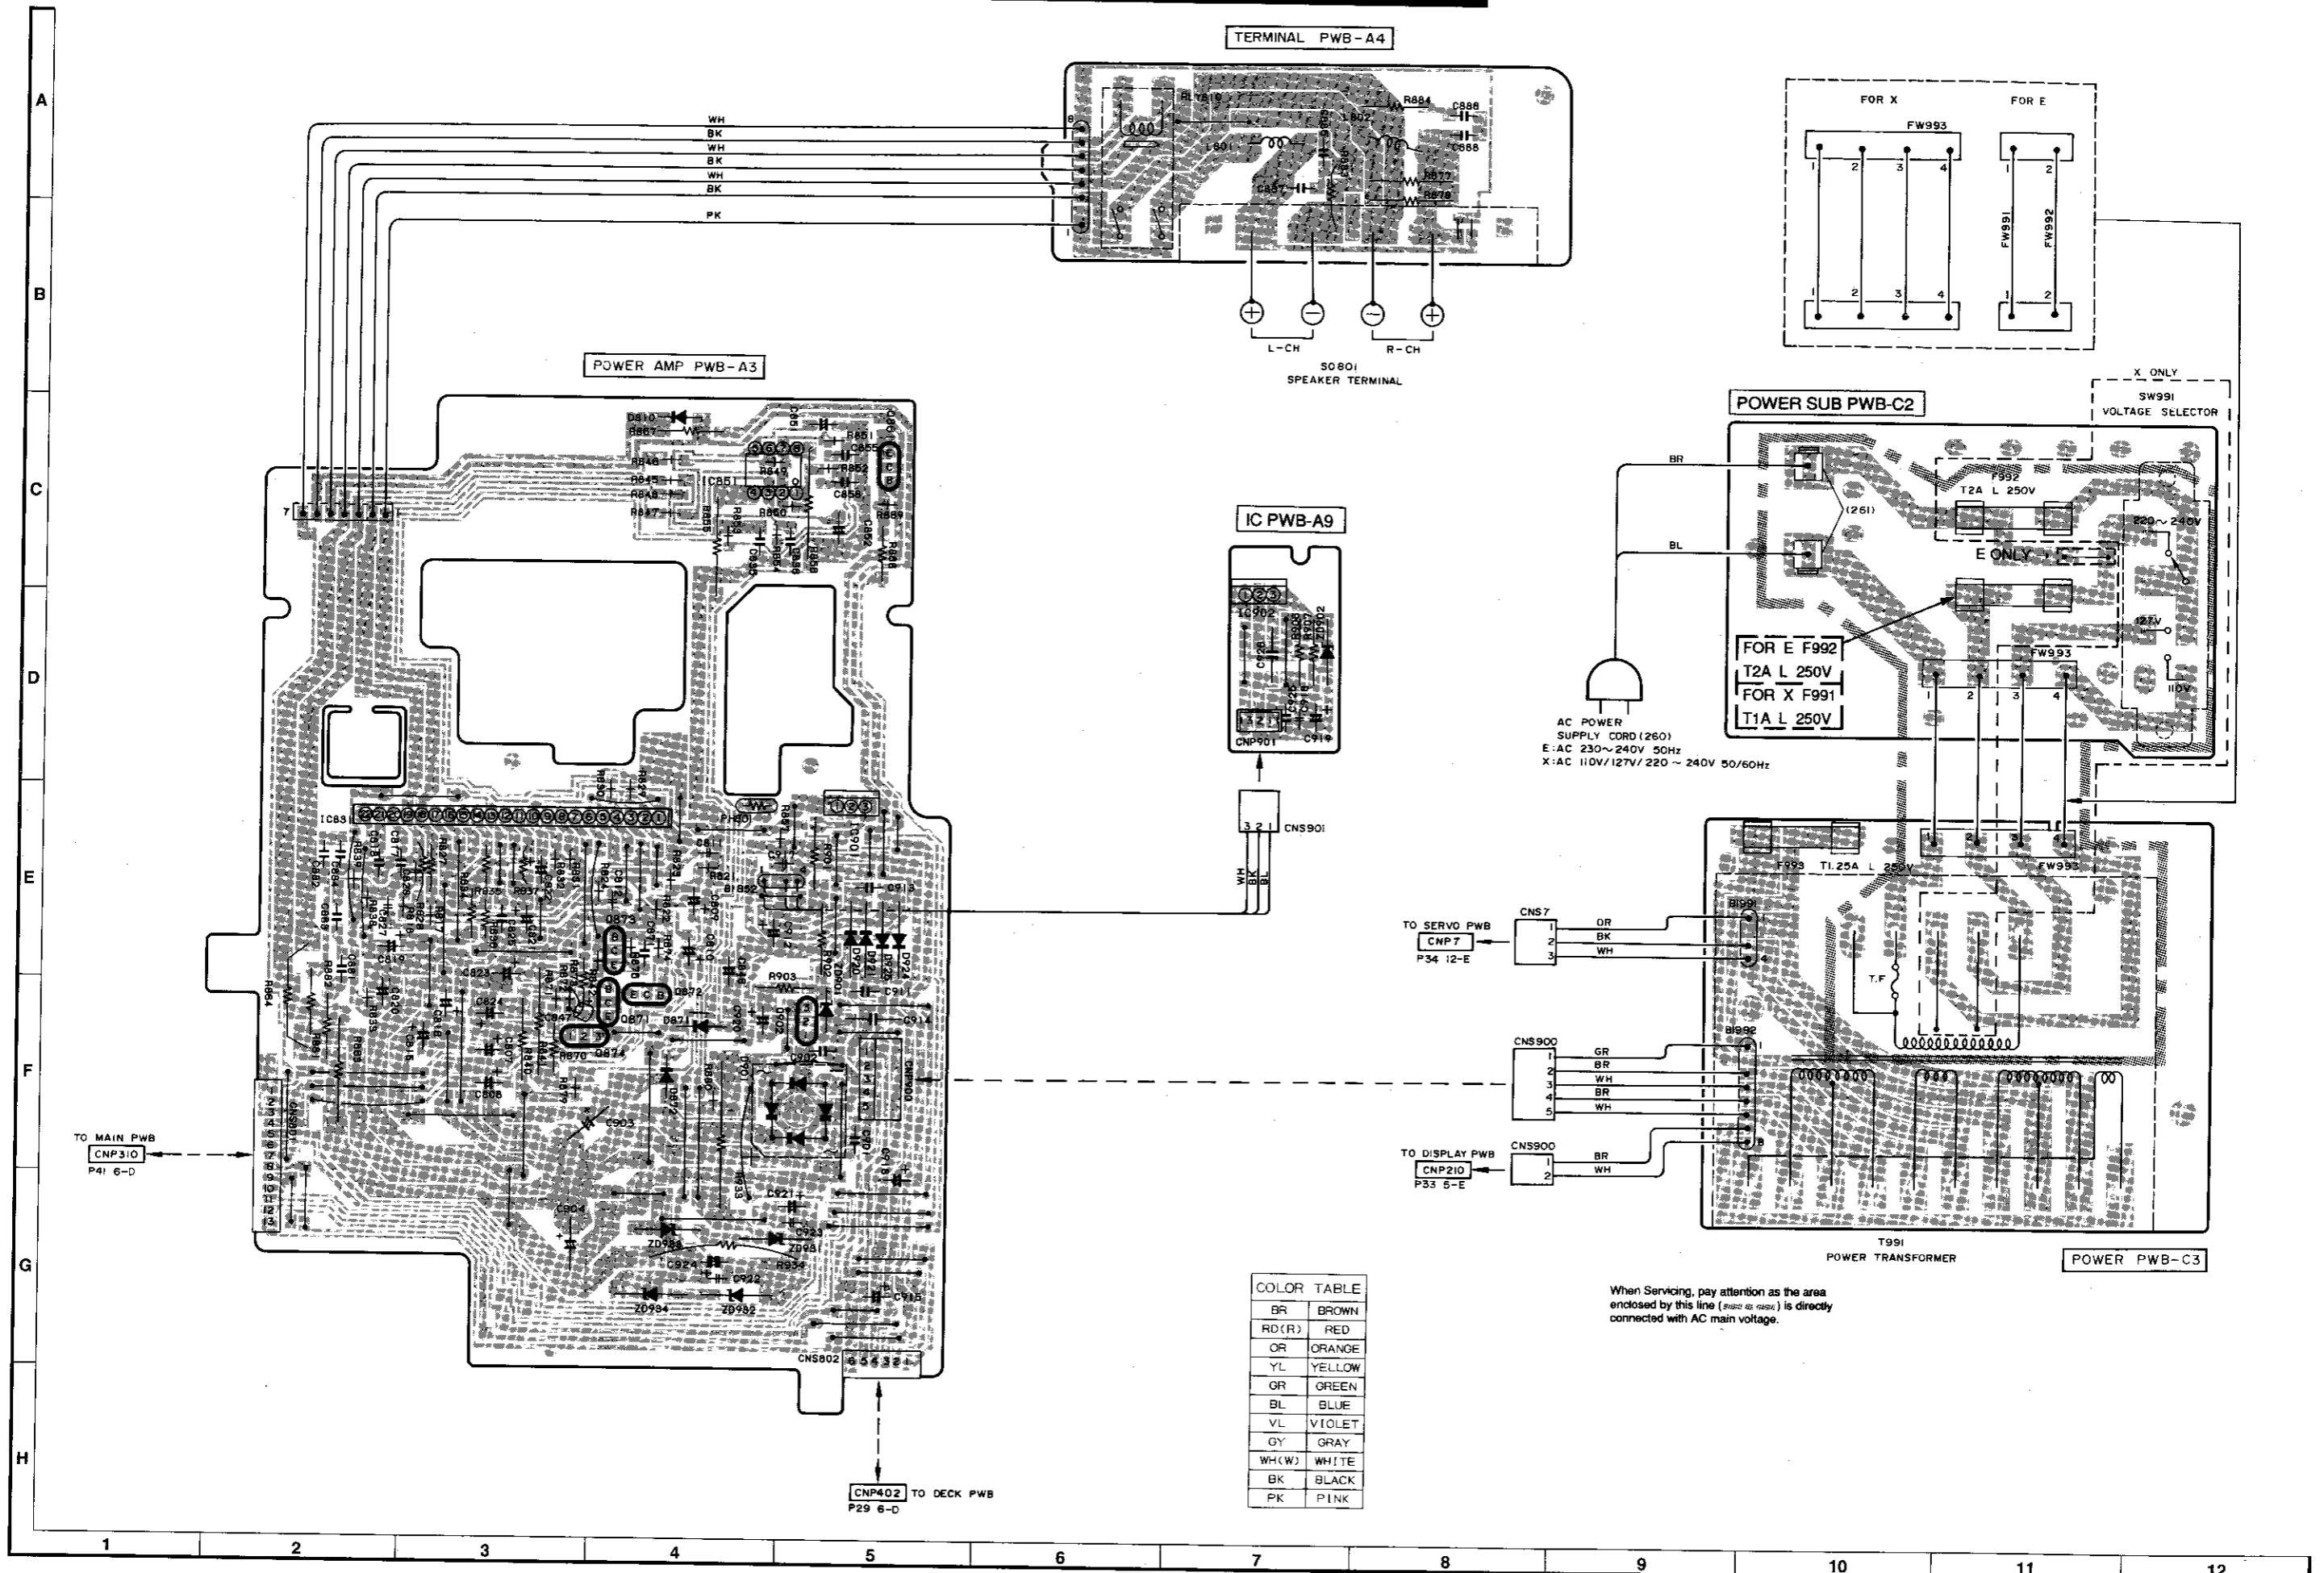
WIRING SIDE OF P.W. BOARD (4/4)
